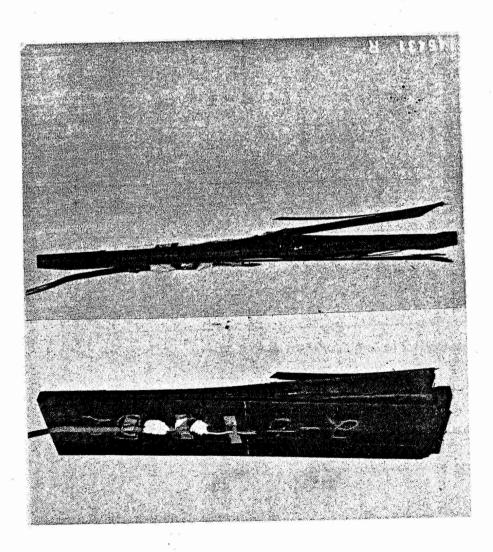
Compression Failure of Specimen 2-5-13B2 Tested in the 2-Inch Wide V-groove Fixture
